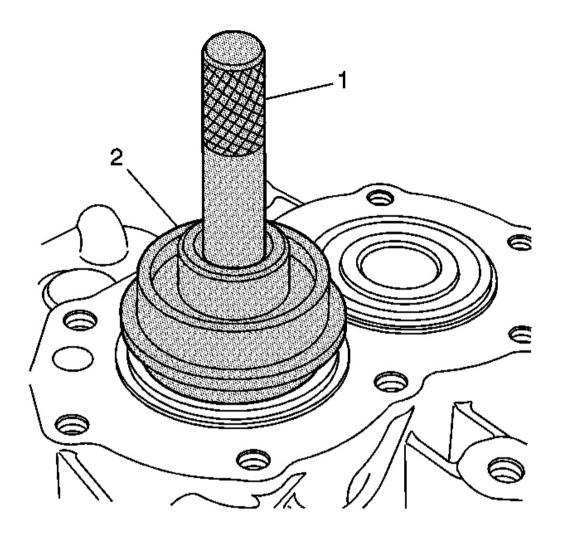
View Of Shift Rod & Bushing Courtesy of GENERAL MOTORS CORP.
